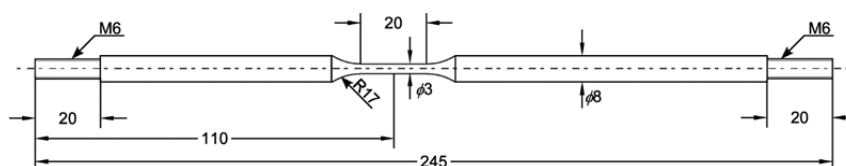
Schematic view of constant load tensile test specimen (mm) [1]
